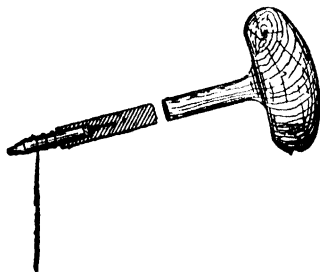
Holding Pin with Piece of Dowel Rod.
